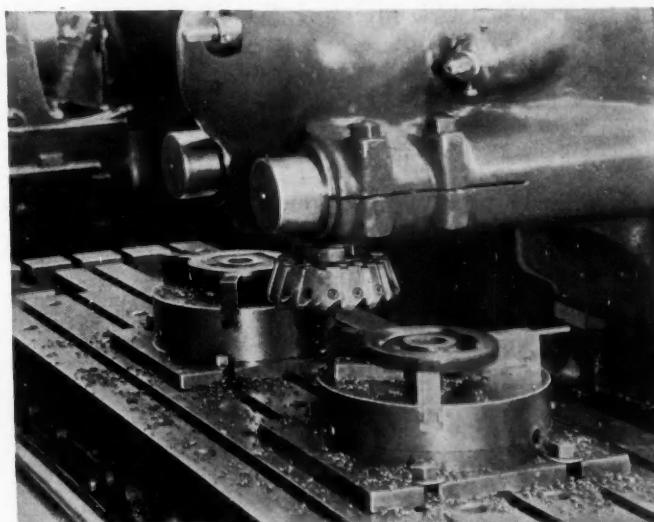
FACE-MILLING ALLOY-STEEL GEAR-BLANKS WITH TANTALUM-CARBIDE CUTTERS
